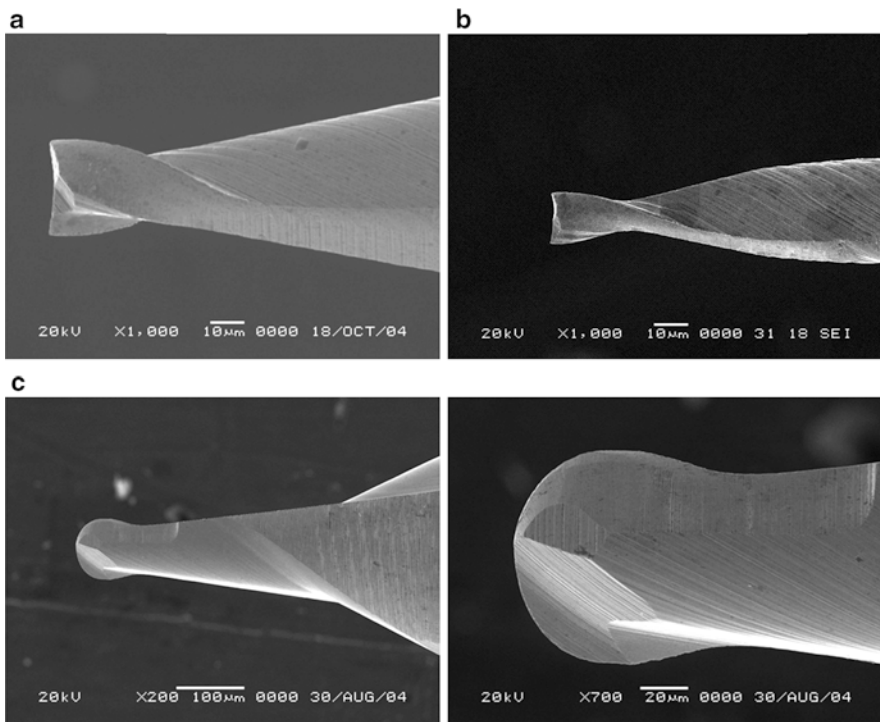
Micro end mill: (a) square end mill, diameter 0.03 mm; (b) square end mill, diameter 0.015 mm; (c) ball end mill, diameter 0.1 mm. (Mitsubishi Hitachi Tool Engineering, Ltd.)
